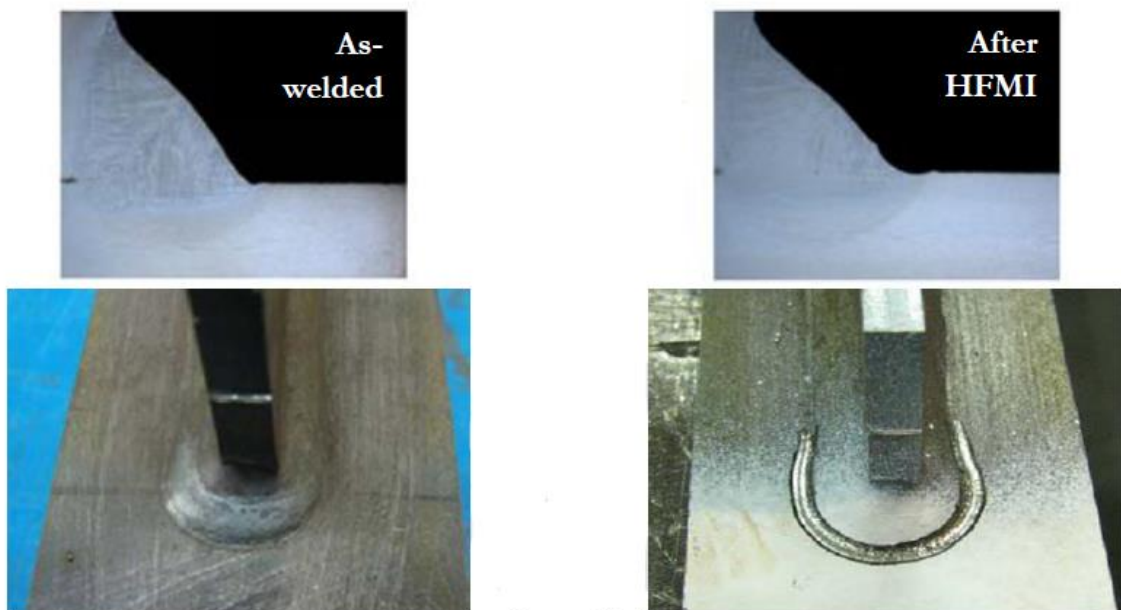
Weld toe profiles in the as-welded condition and HFMI-treated condition [6].
